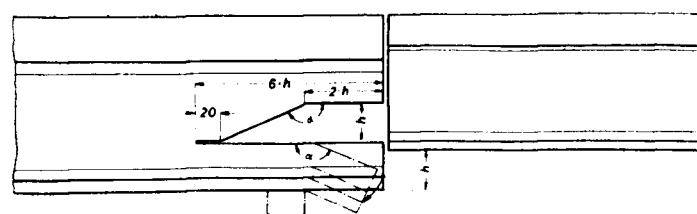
Welding preparations on a transition joint by adjusting the bigger rail profile to the smaller one.
